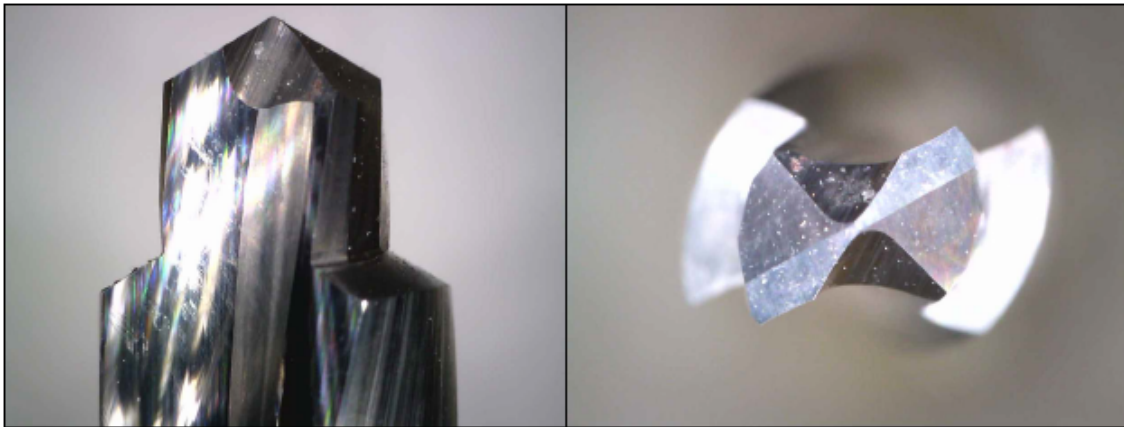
Uncoated drilling tool appearance after 58 holes using semi-automatic machine with pneumatic machine parameters.
